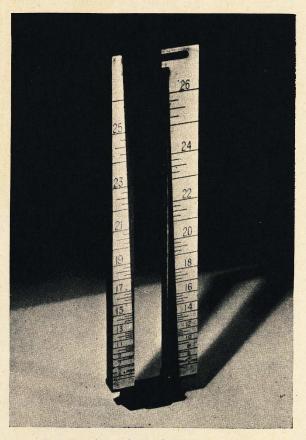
The sight leaf is machined from a SAE1035 W.D. forging and must be held within close dimensional tolerances
